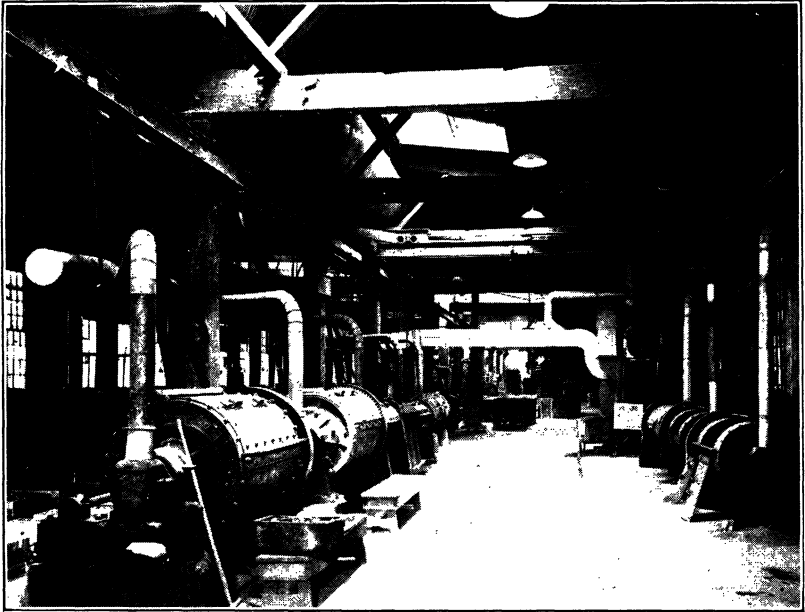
Hollow-Trunnion Tumblers with Local Exhaust Ventilation (*Courtesy American Air Filter Co.*)
